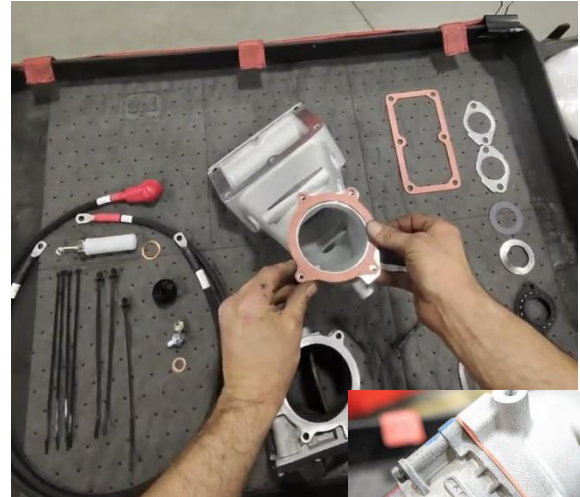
Installation of new throttle valve gasket. New intake horn and throttle valve assembled.
